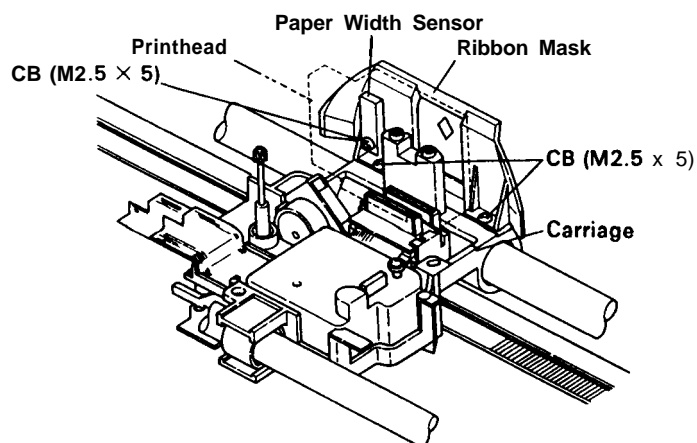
Paper Width Sensor and Ribbon Mask Holder Removal
